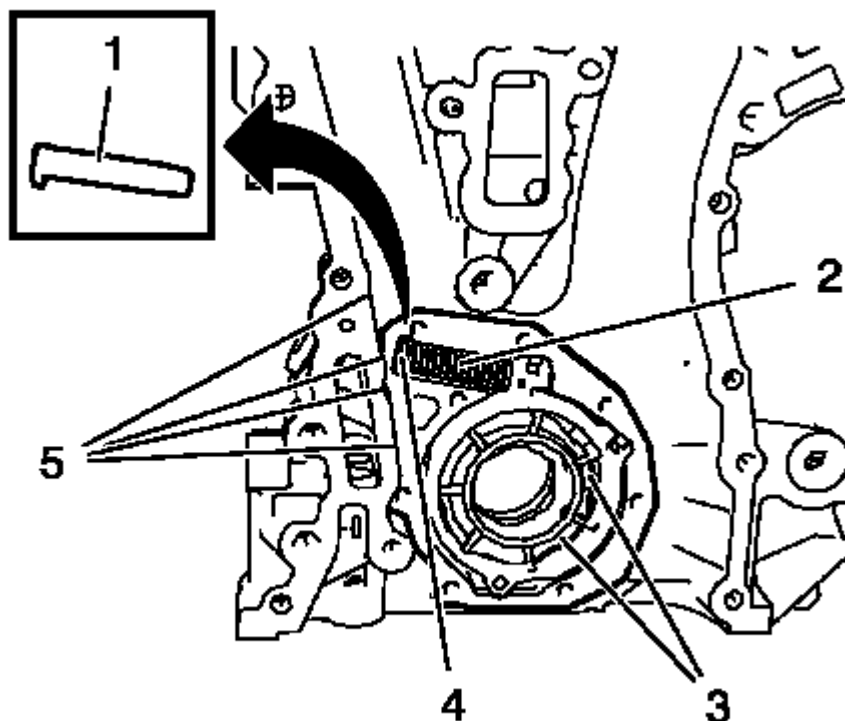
Oil Pump Slide Spring, Pin, Chambers And Front Cover Edge
